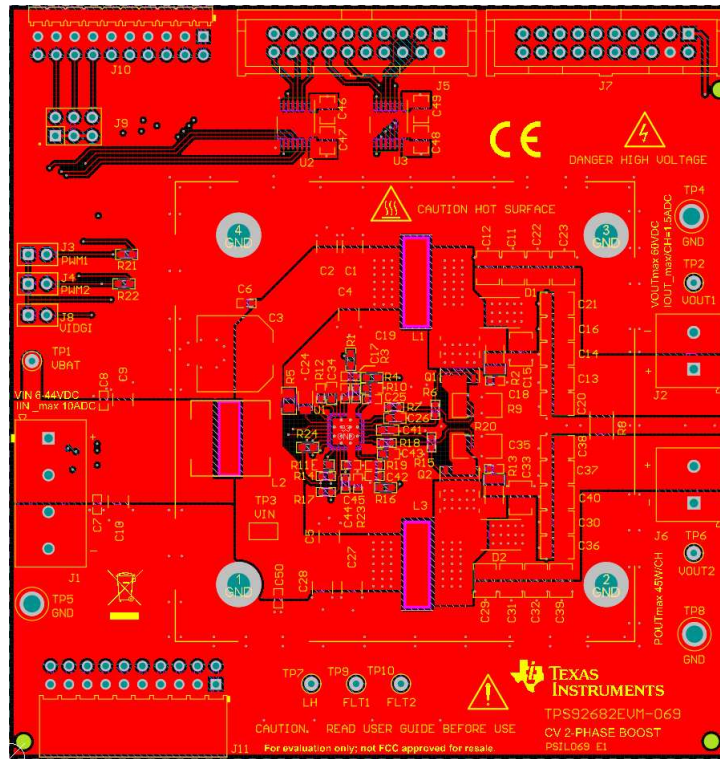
TPS92682EVM-069 Top Layer and Top Overlay (Top View)
